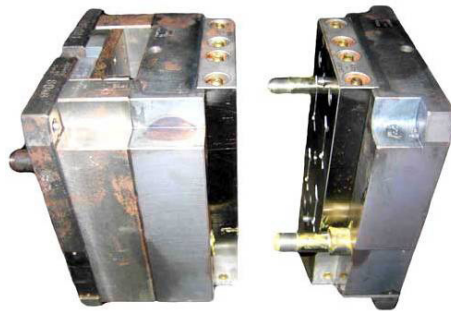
A simple LEGO mould, consisting of two moving parts. More complex moulds can have different types of exhaust, curtains etc.
